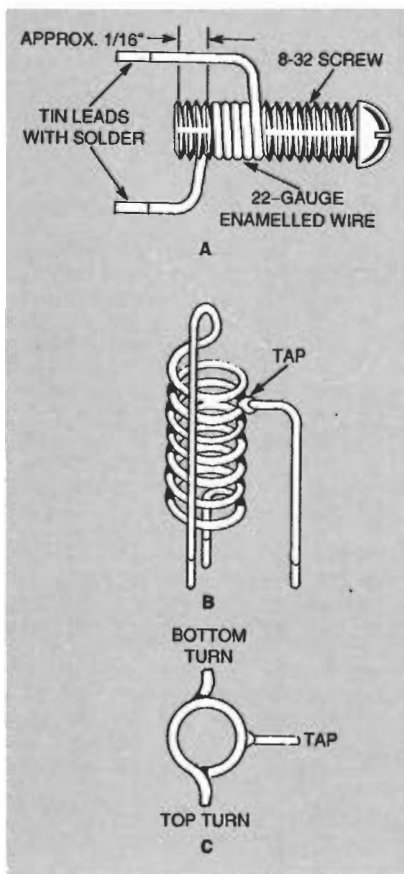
Making L1 is simplified by using an 8-32 screw as a winding form (A). Be sure the screw is steel instead of brass, or you might solder the coil to the screw when attaching the tap (B). After the coil is installed in the PC board and the screw removed, it should look like (C) when viewed from overhead.
